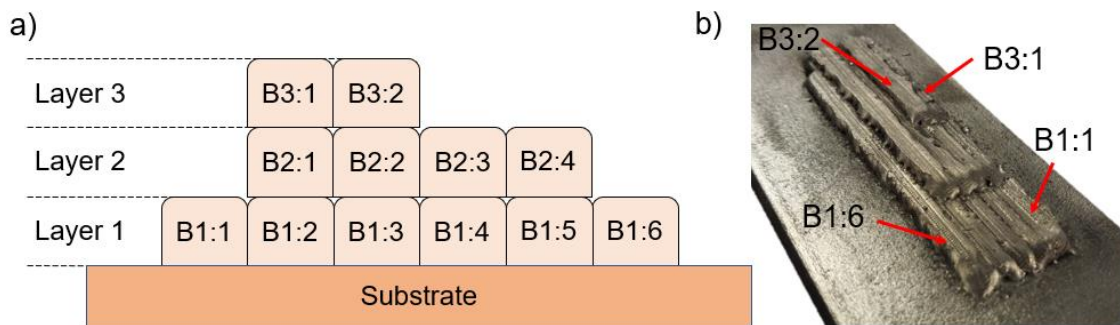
Multi-bead sample produced with the hot forging system: a) deposition configuration; b) photograph of the produced sample
